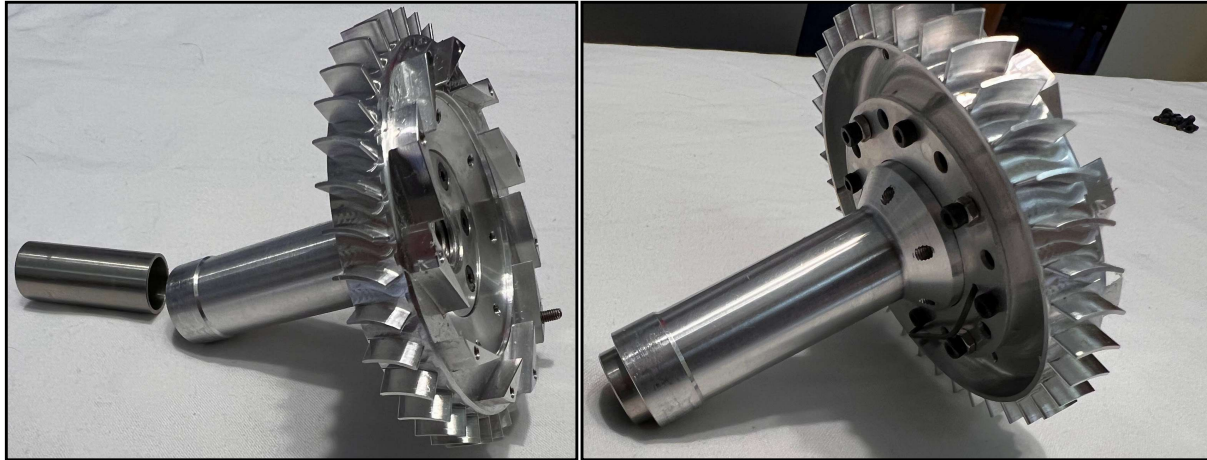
Completed diffuser assembly (right) prior to compressor integration. Tube (left) slides into shaft on aft end of assembly.
